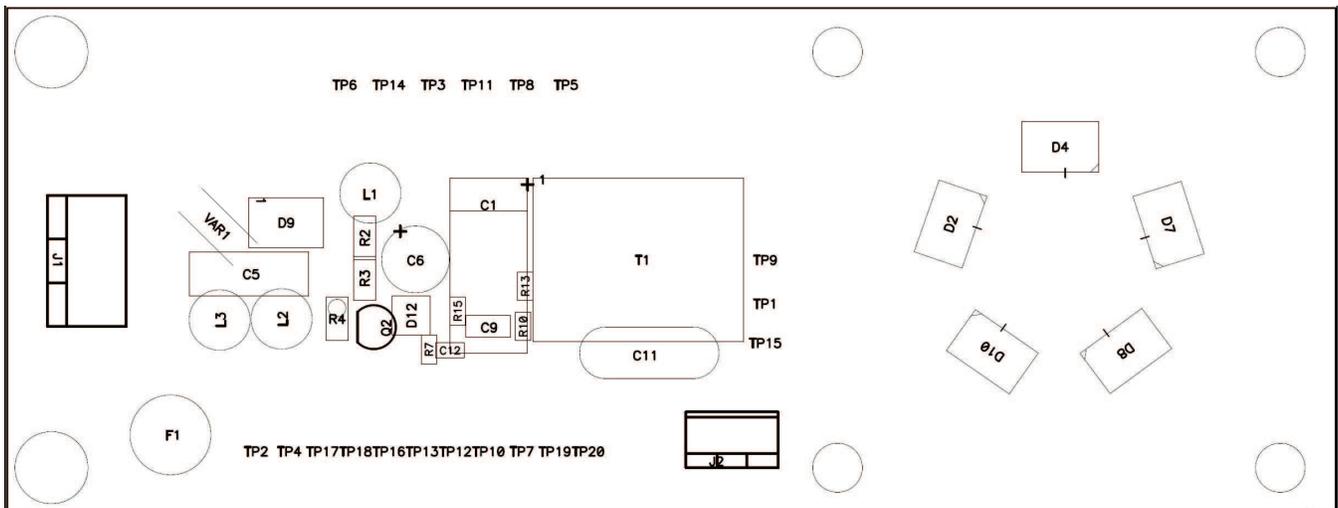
TPS92070EVM-682 Top Layer Assembly Drawing (top view)
